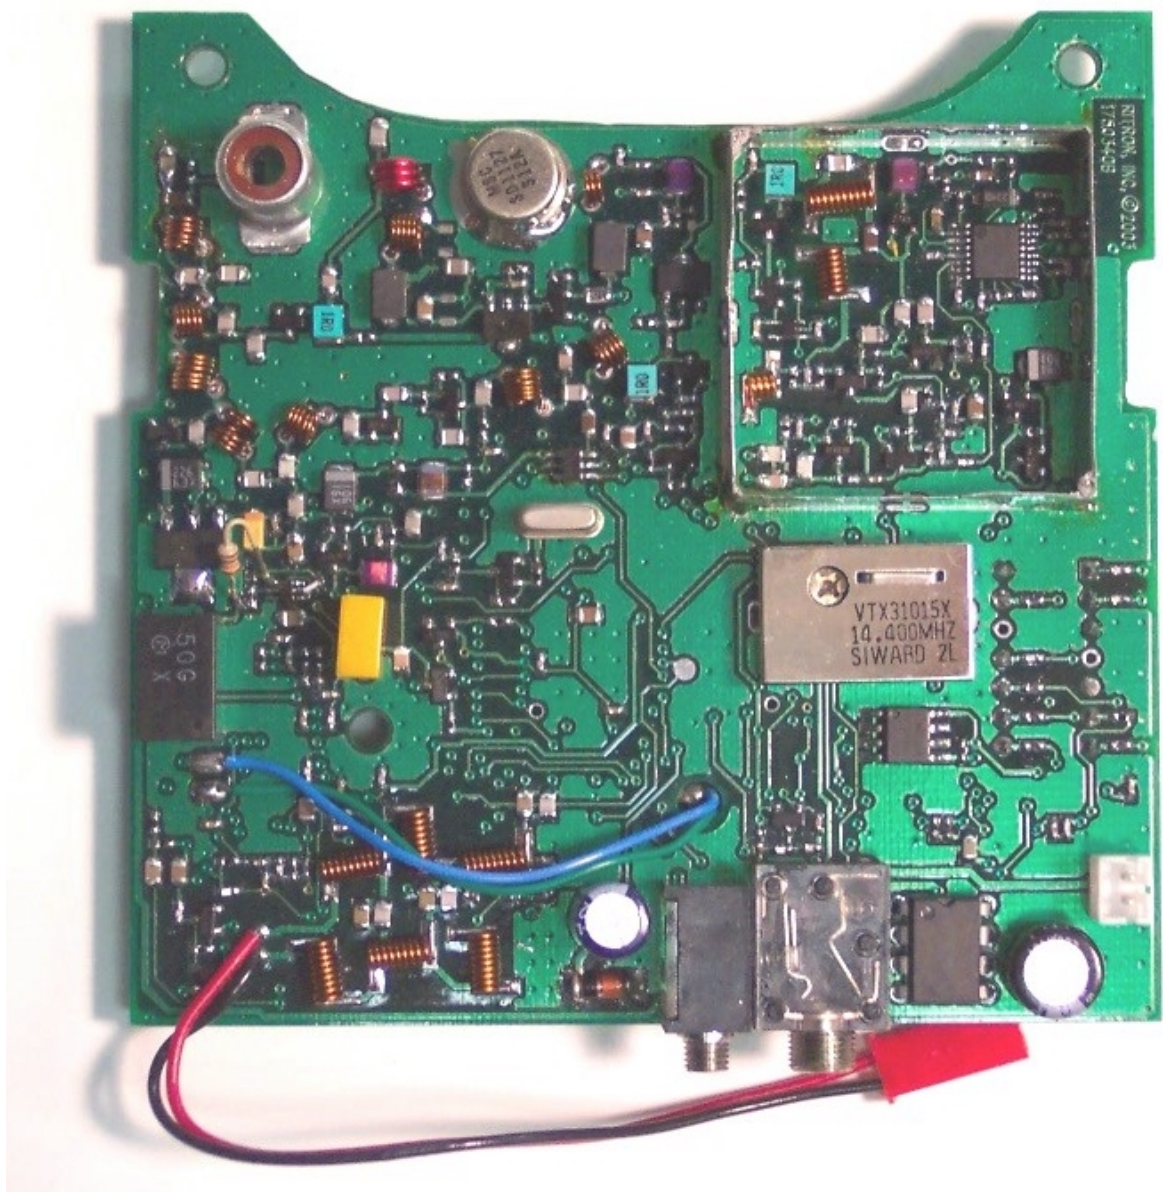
D complete bottom side PCB assembly with VCO Shield removed
